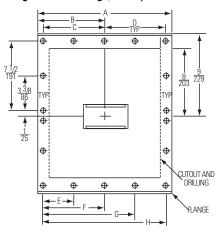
Flanged End with Lugs, 2 Bars per Phase
